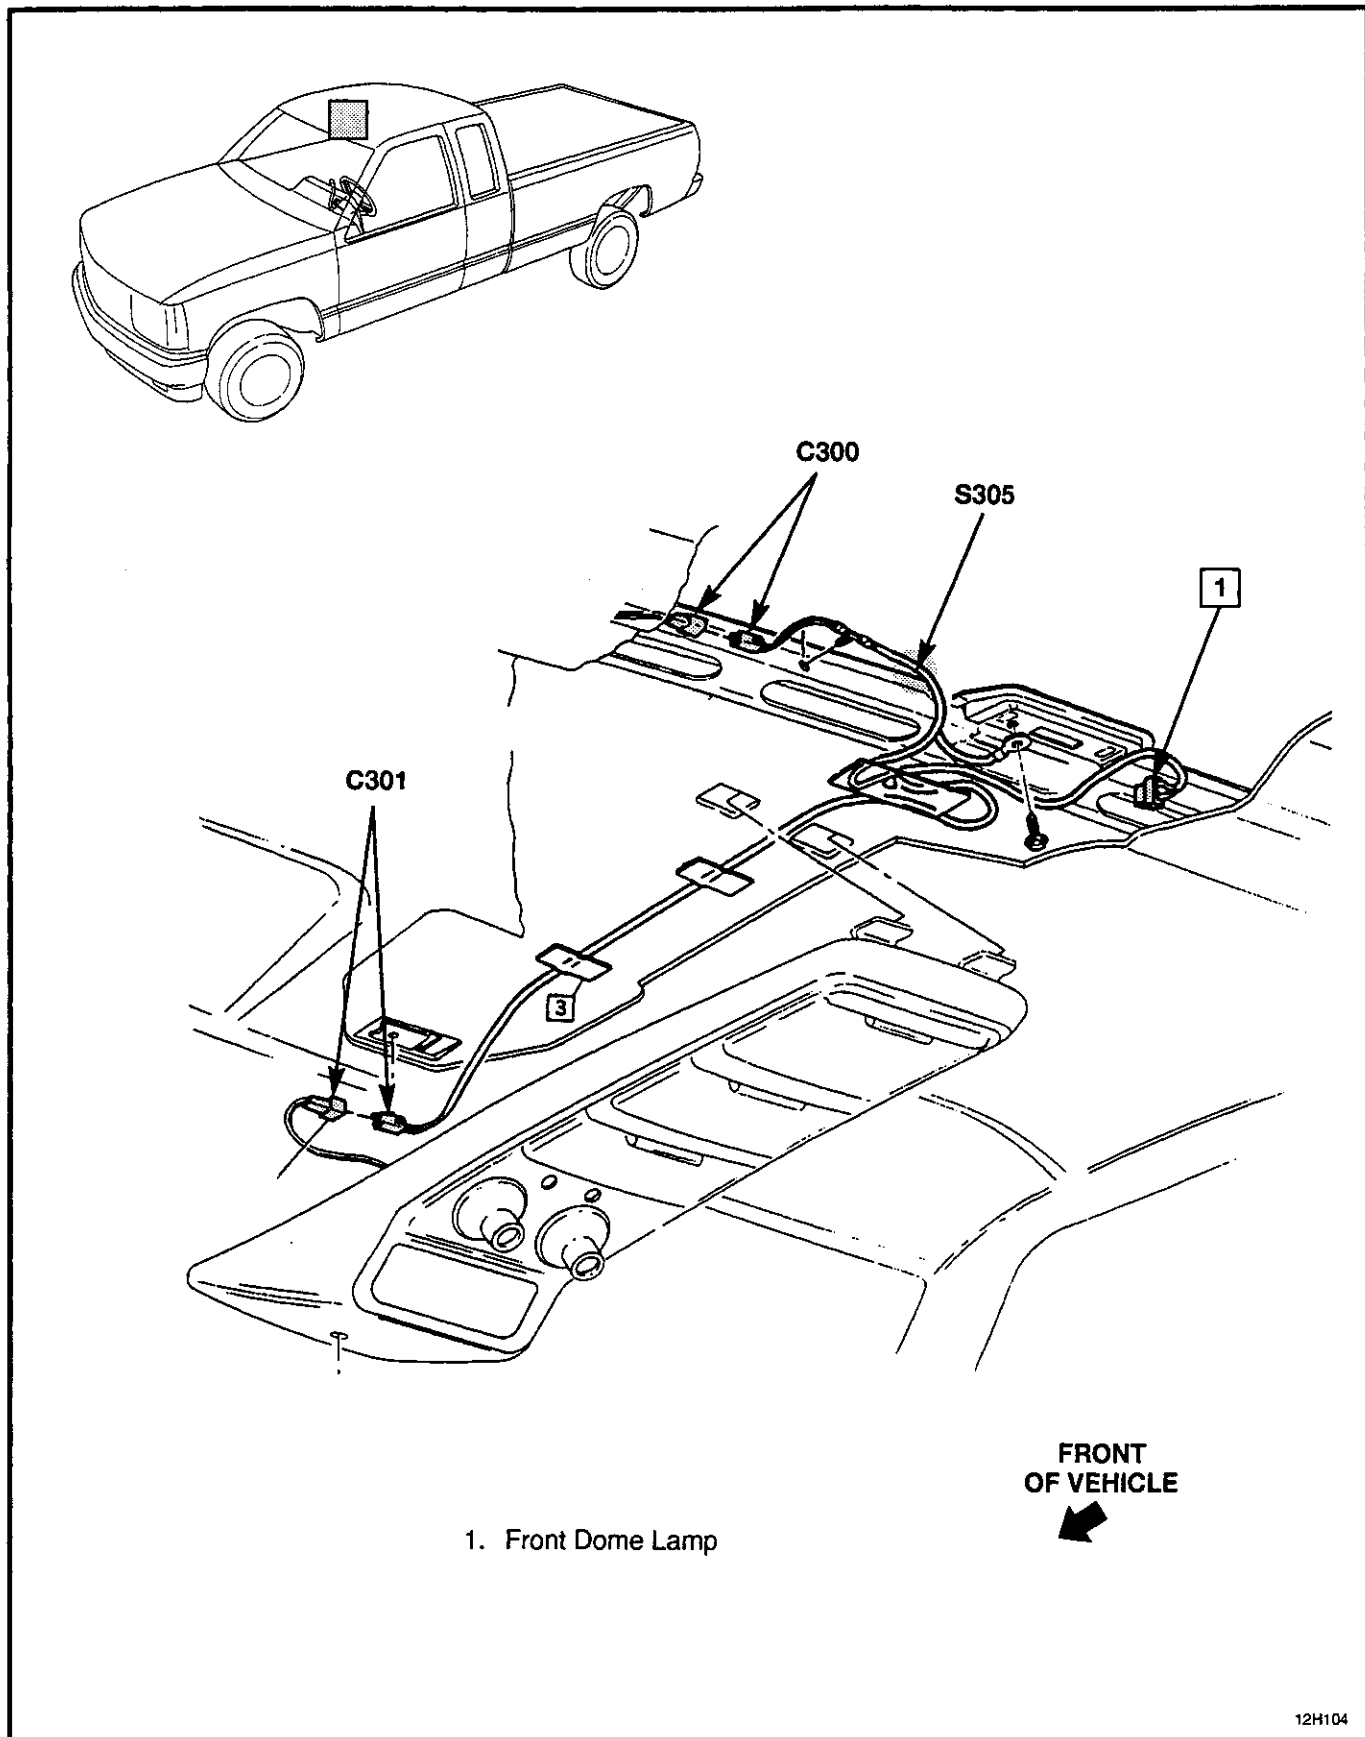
Roof Console and Dome Lamp Wiring – Suburban, Utility and 4-Door Pickup
